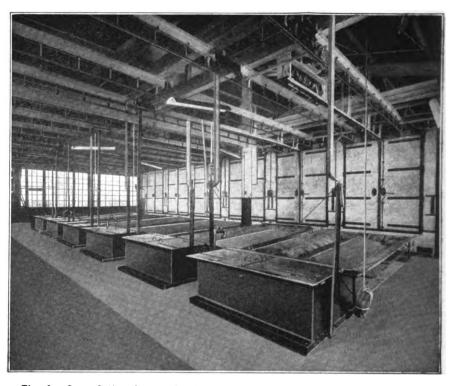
One of the three units installed by the Studebaker Corp., showing ovens, dripping tanks, drip boards, over head conveyors and accessory equipment.
